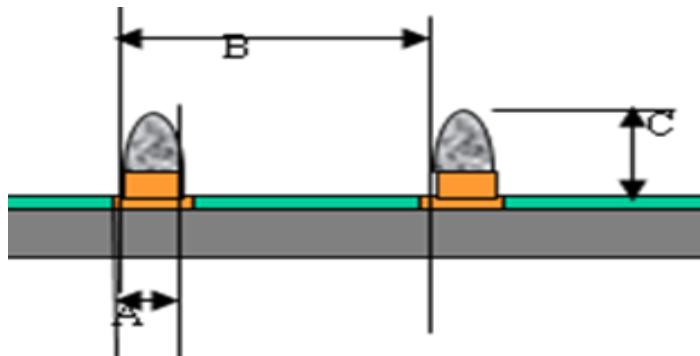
Typical Test vehicle design used in the wafer-level solder microbumping.
